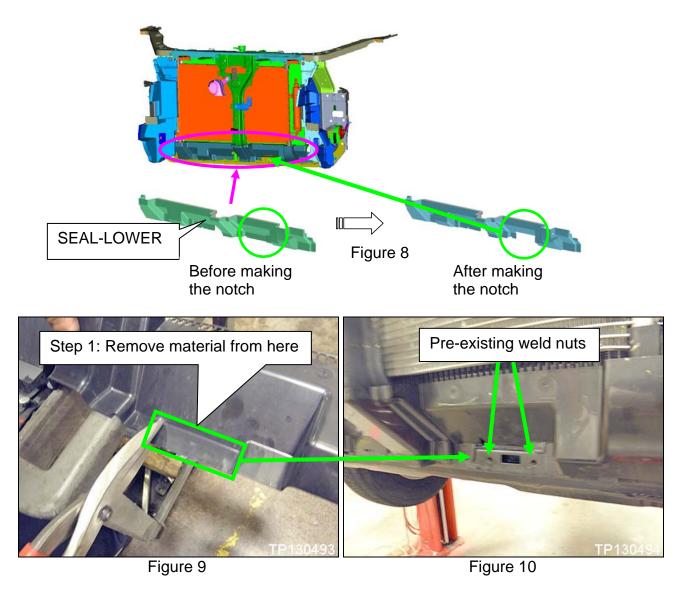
and Figure 10 illustrate the area to remove the material to allow clearance to install the BRKT ASSY-O/COOLER, LWR.
